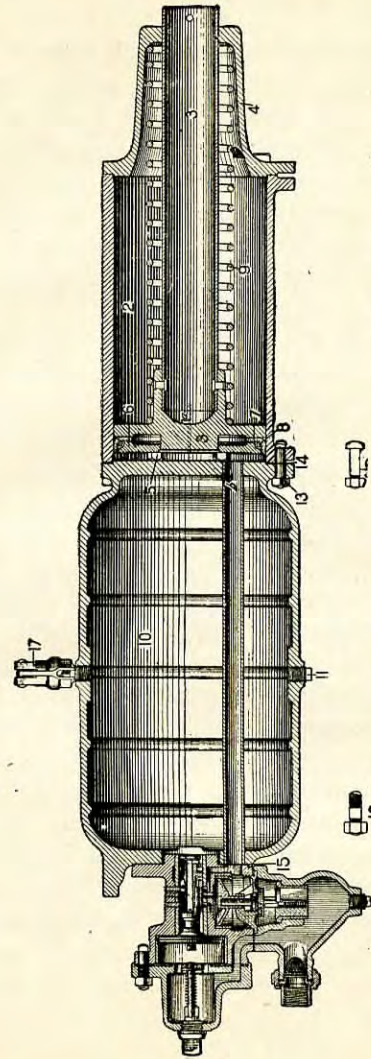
Brake Cylinder Auxiliary Reservoir and Triple Valve.
